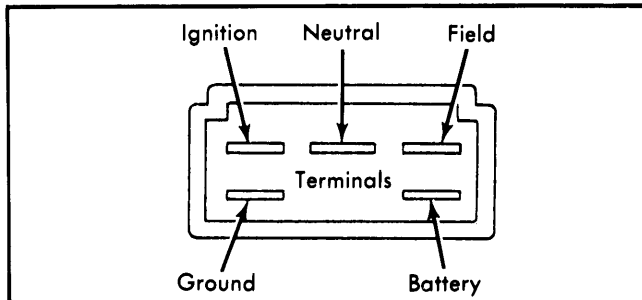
Terminal Position for Two Element Type Regulator Wiring Connector.
